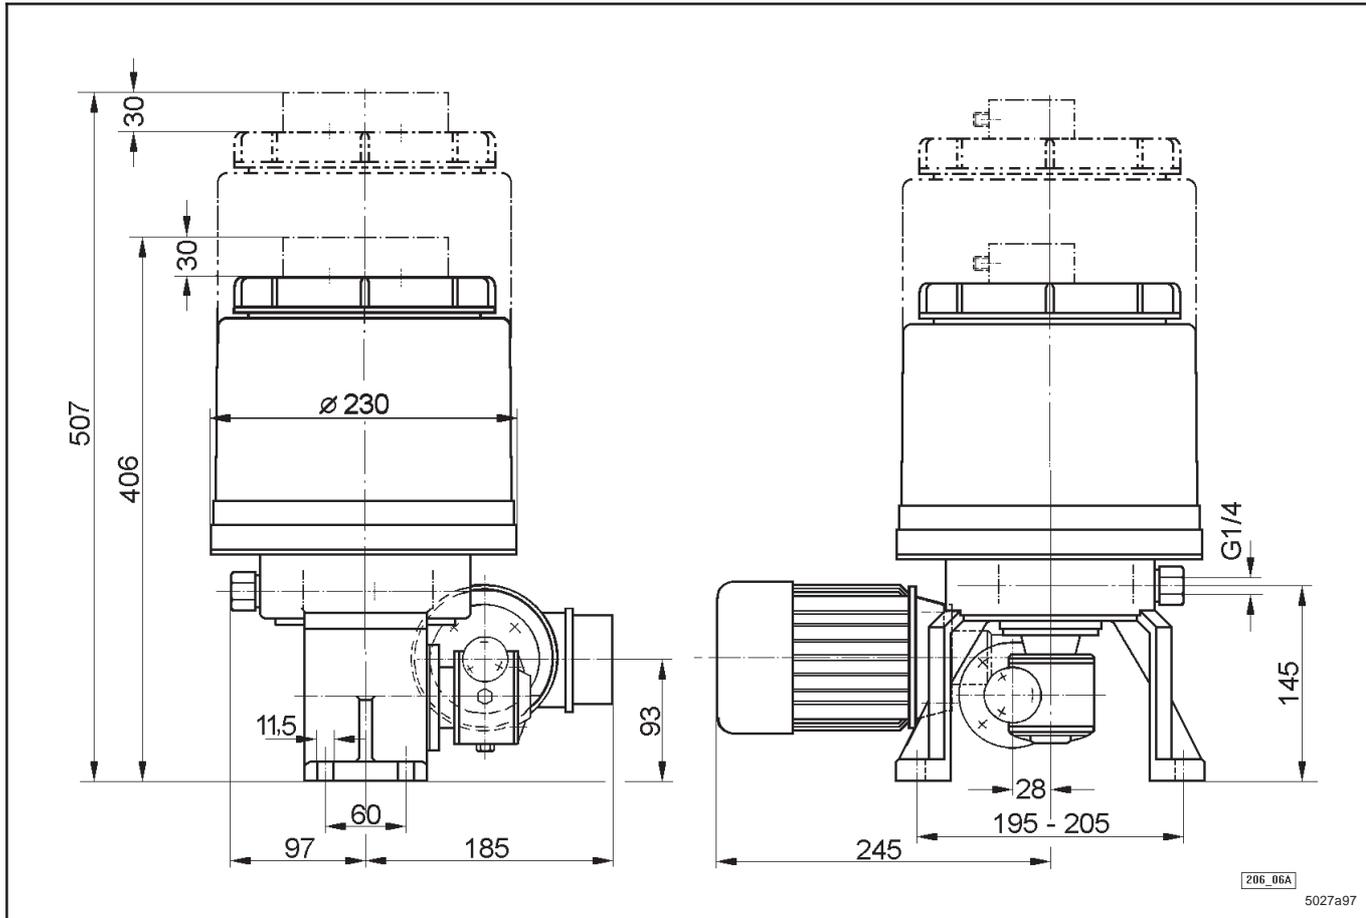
Dimensioned drawing of pump P 205, two-stage gear, 4/8 l plastic reservoir, motor drive
